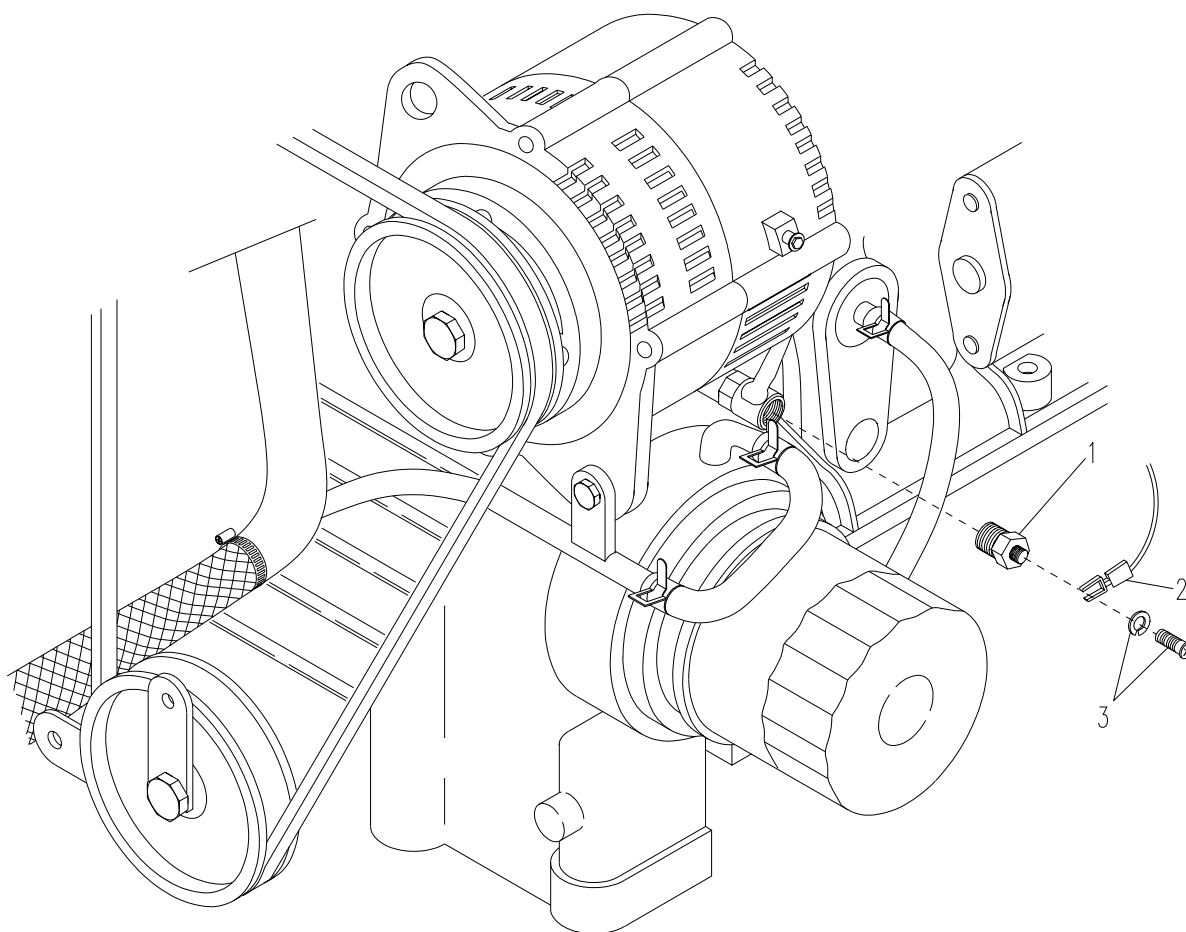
Low Oil Pressure Switch (Sheet 2)
